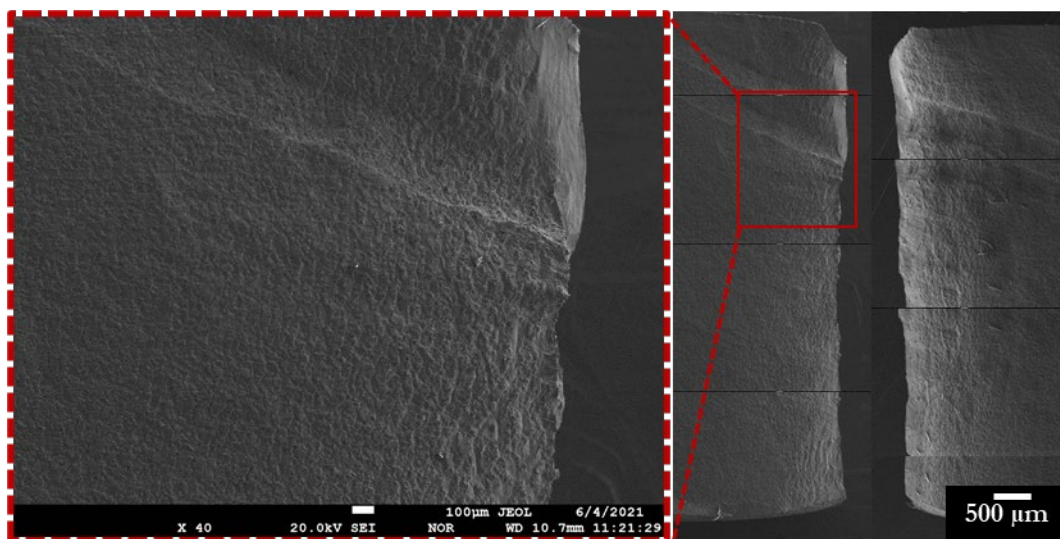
SEM Image of a Tensile Sample Showing a Deformation Band on the Fracture Surface (in Red Box) and Fracture Surfaces from the Top and Bottom Part of the Sample.
